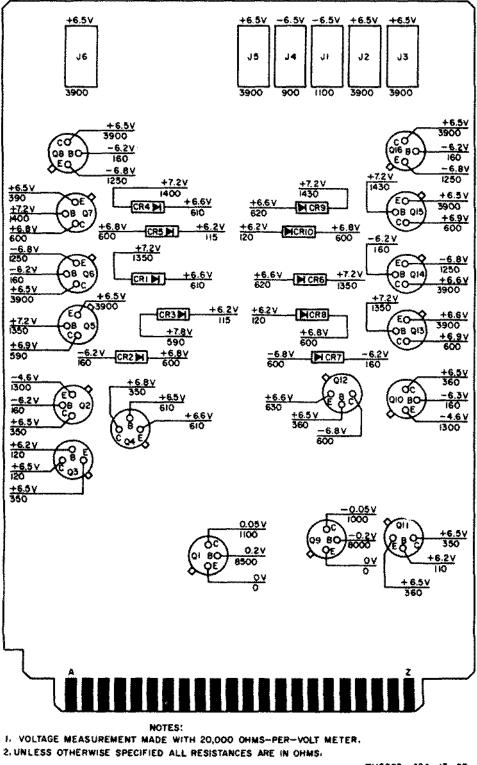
PC card assembly A5 (PC 80034150) voltage and resistance diagram.
